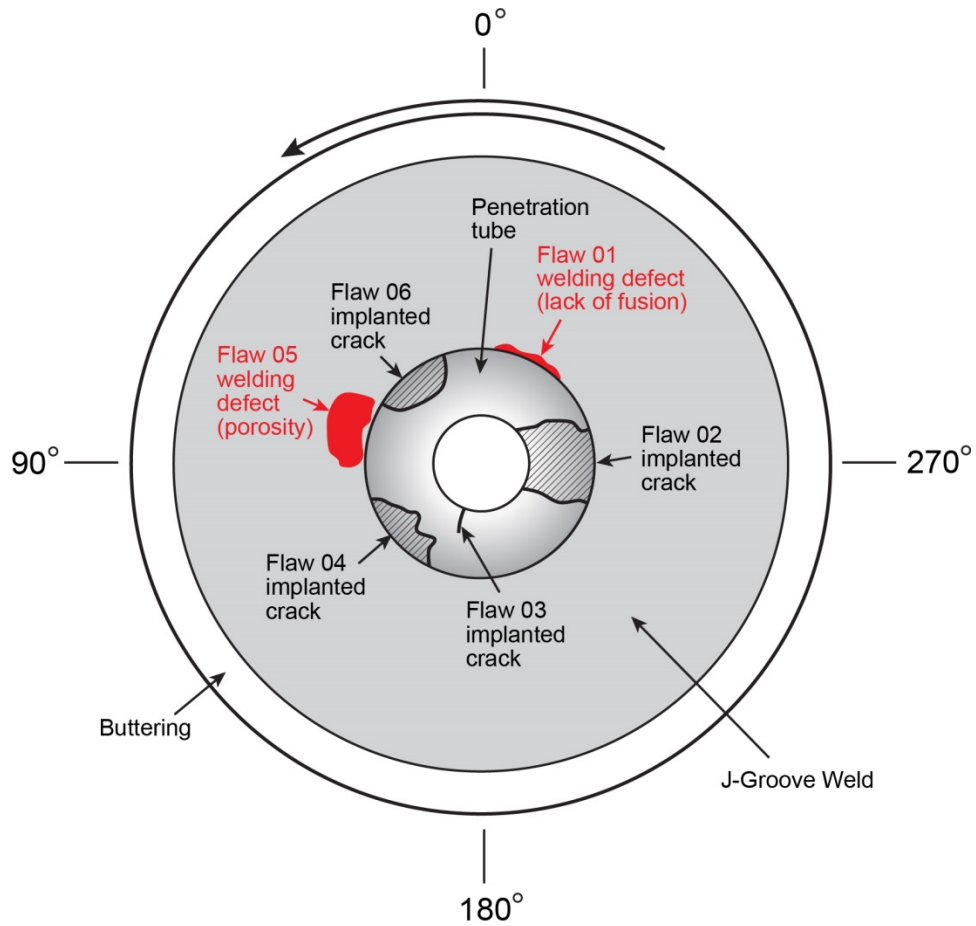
Top View Illustration of the True State Used for J-groove Weld Surface Testing of PARENT Test Block P25 (PINC Test Block 5.1). The true state used in PARENT is emphasized with red shading of Flaw 01 and Flaw 05.
